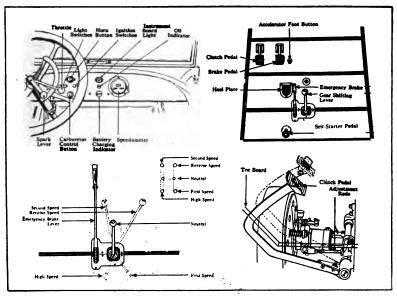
Control Element of Mitchell Six-of-Sixteen.
